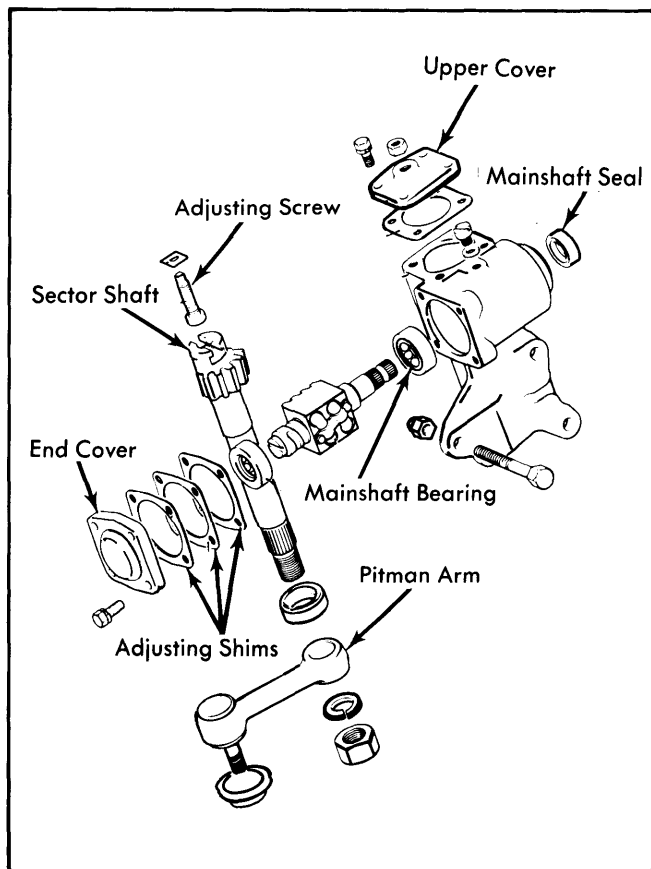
Exploded View of Recirculating Ball & Nut Steering Gear — 1600 cc Engine
